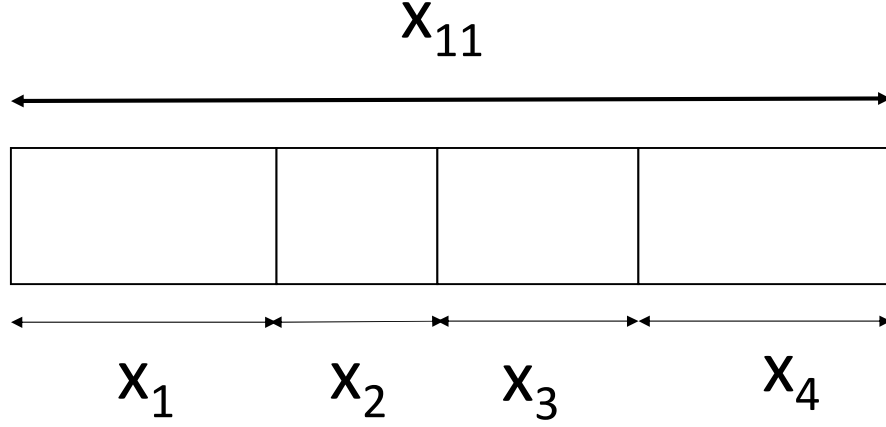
Four Part Assembly Tolerance Stack-up
